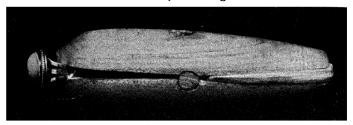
Ring clamp used for holding rings. Clamps like this are easily made.
